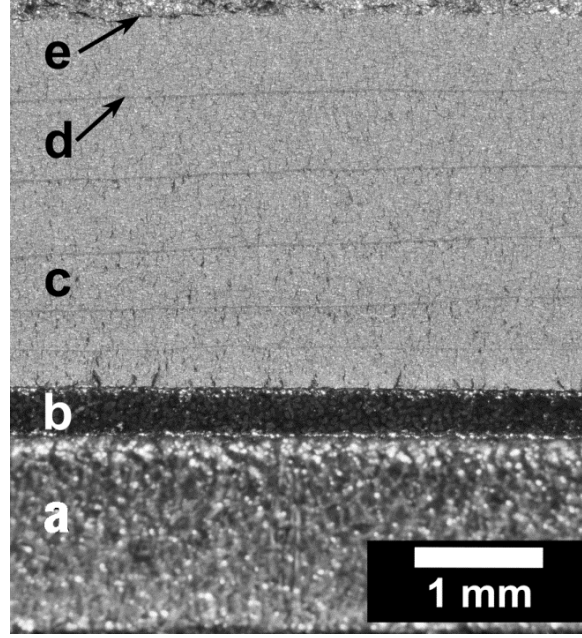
Fatigue fracture surface of a fatigue crack calibration specimen. From the bottom of the image, progressively are shown (a) the surface of the thick EDM notch, (b) the thin EDM notch, (c) the fatigue crack fracture surface in which the thin, horizontal dark lines as indicated by (d) are the fatigue marker bands, and (e) finally at the top is the brittle fracture surface generated during the procedure to expose the fracture surfaces.
